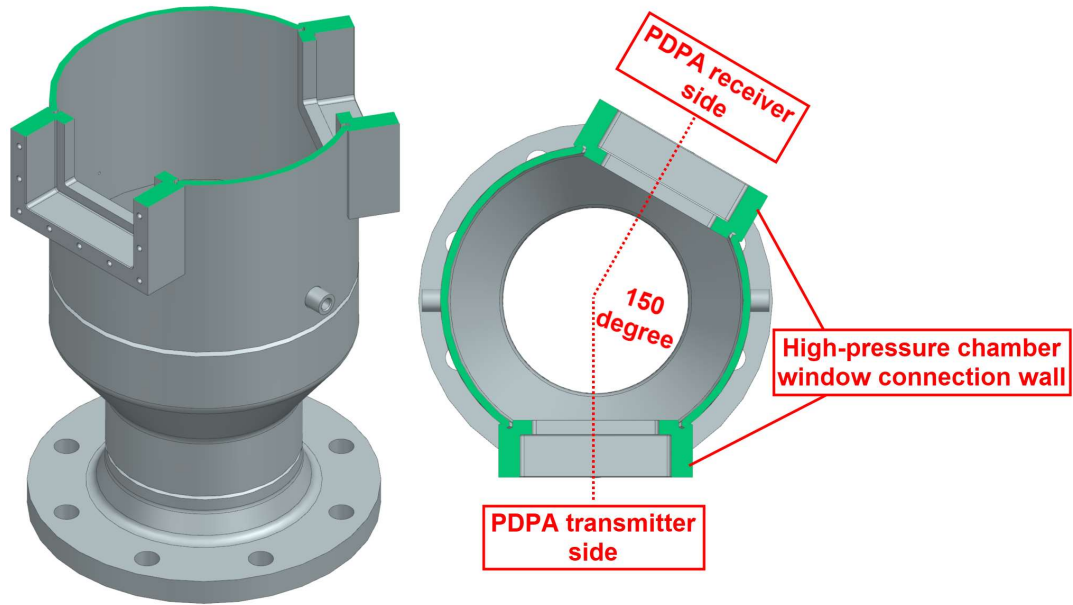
High-pressure chamber assembly, PDPA (cross-sectional view 2).
